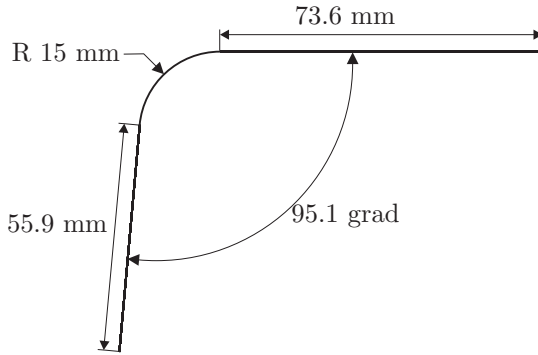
The dimensions of the weld seam defining trajectory B
